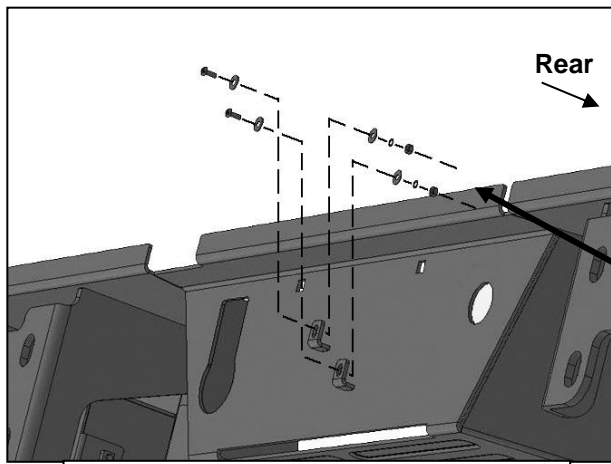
Sensor Assembly attached to sensor sleeve on the back of the Bumper
